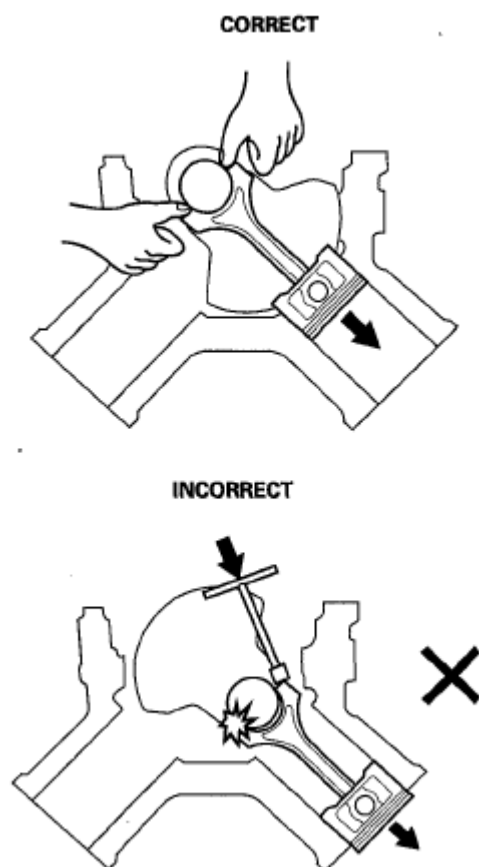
Removing Piston/Connecting Rod Assembly By Pushing On Connecting Rod
